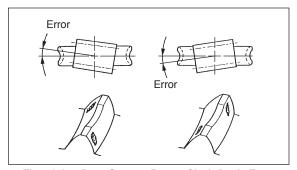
Poor Contact Due to Shaft Angle Error
